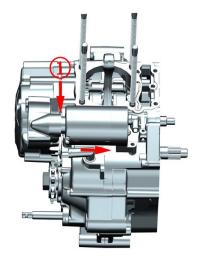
LI	EFT CRANKCASE	Remove left crankcase cover 2	CHK	Q
